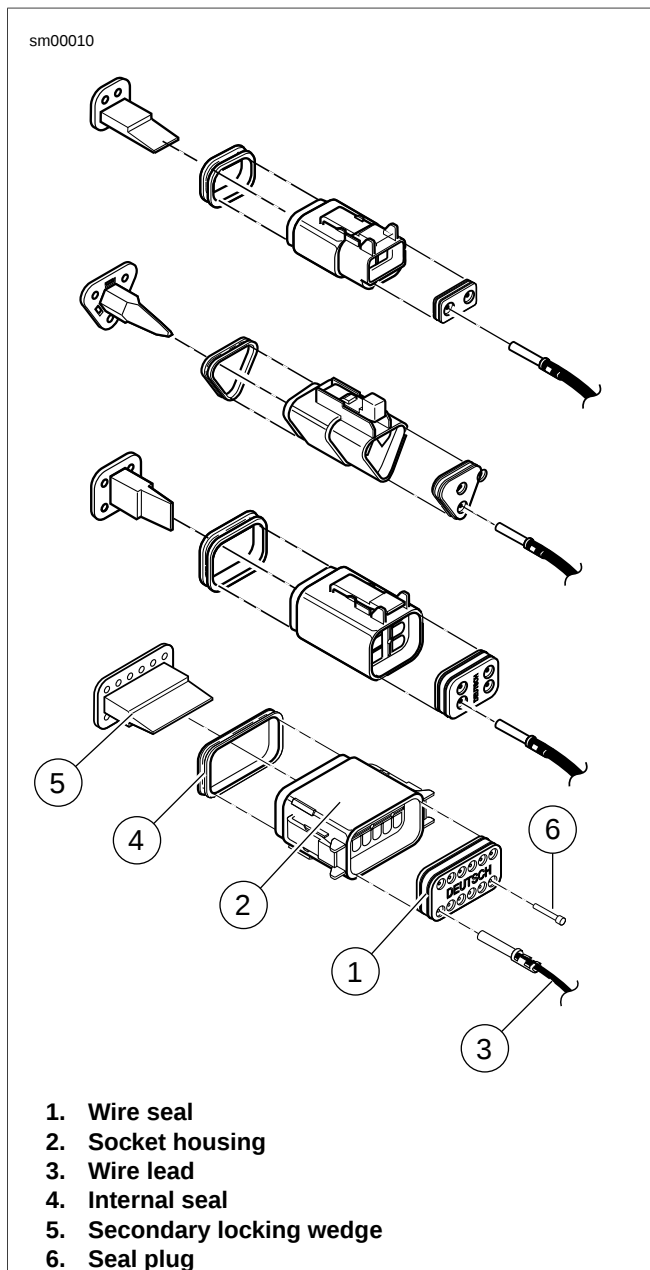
Deutsch DT Sealed Connector: 2, 3, 4 and 12-Place Socket Housings
